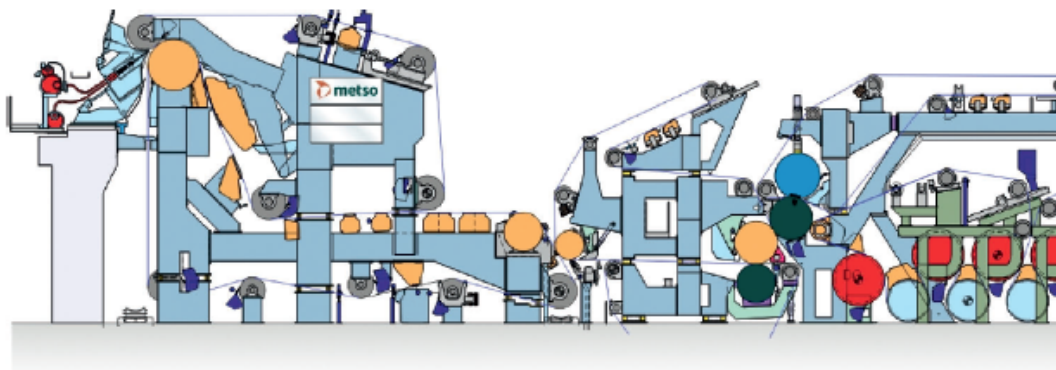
Details of the forming section of the machine in Figure [III / 1]. [31]
